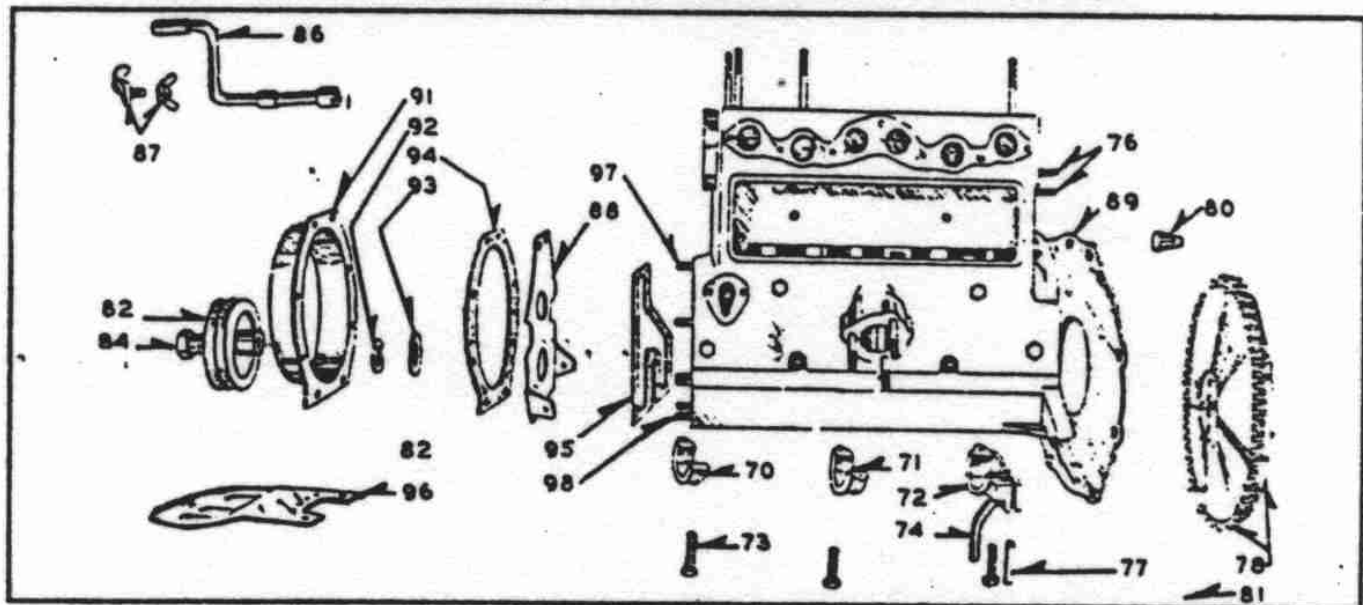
TIMING CHAIN COVER, FLYWHEEL, BEARINGS AND CRANK GROUP
